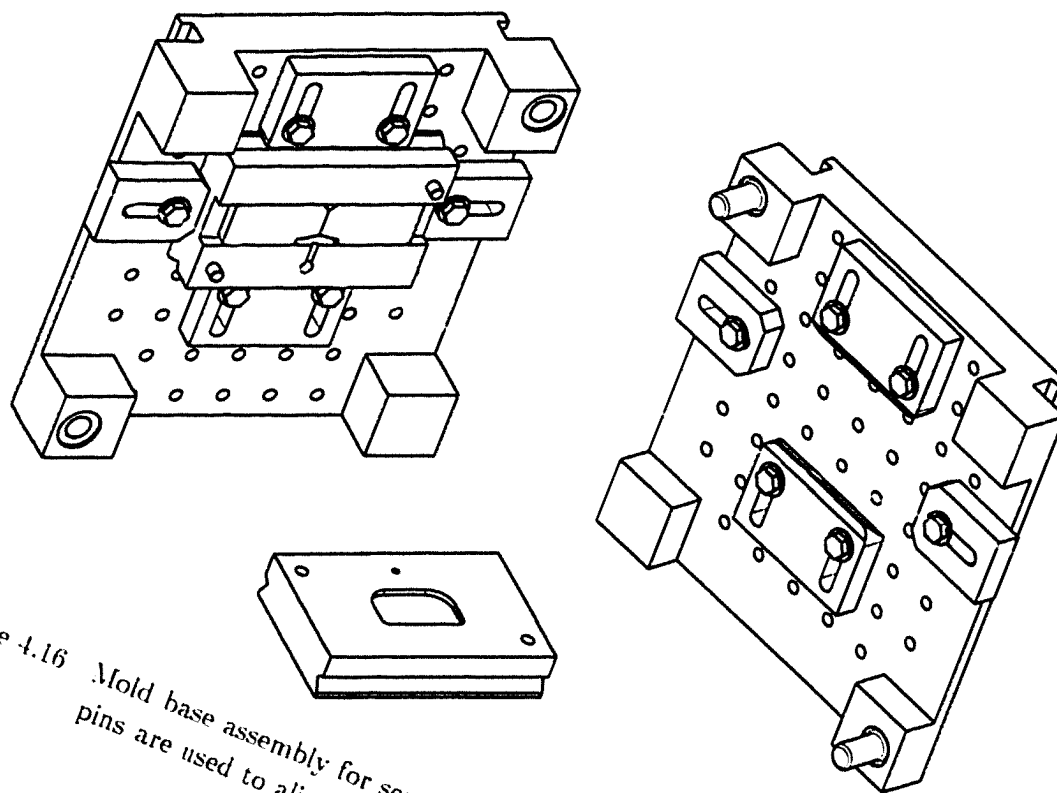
Mold base assembly for semi-automatic operation. The small pins are used to align the mold plates, and then removed.
